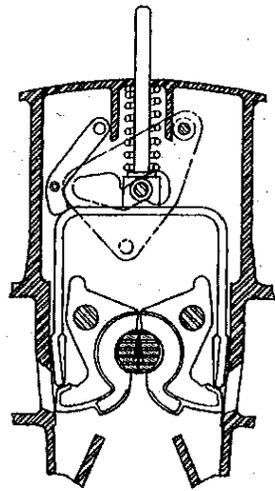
Holland A-type locking mechanism. (Courtesy of The Holland Group, Inc.)
